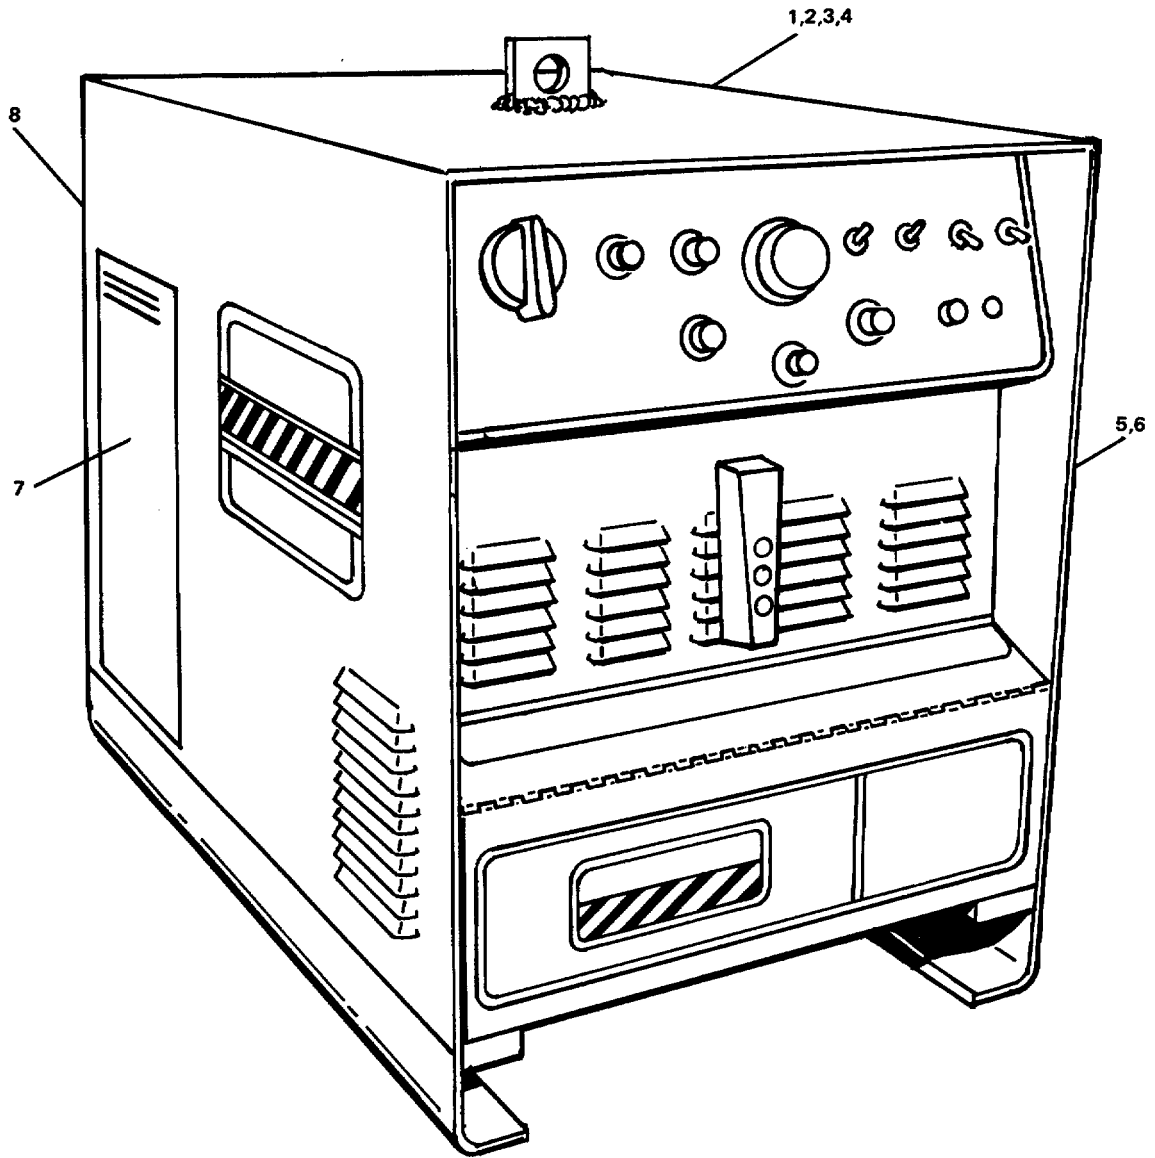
Repair Arc Welding Machine (Sheet 1 of 2).
